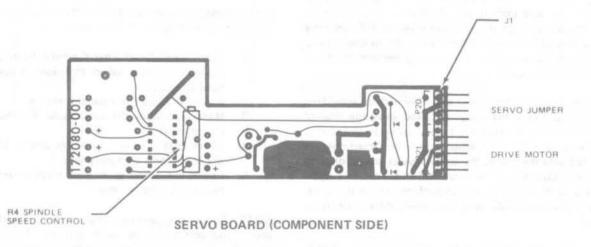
PC BOARD COMPONENT LOCATIONS.
